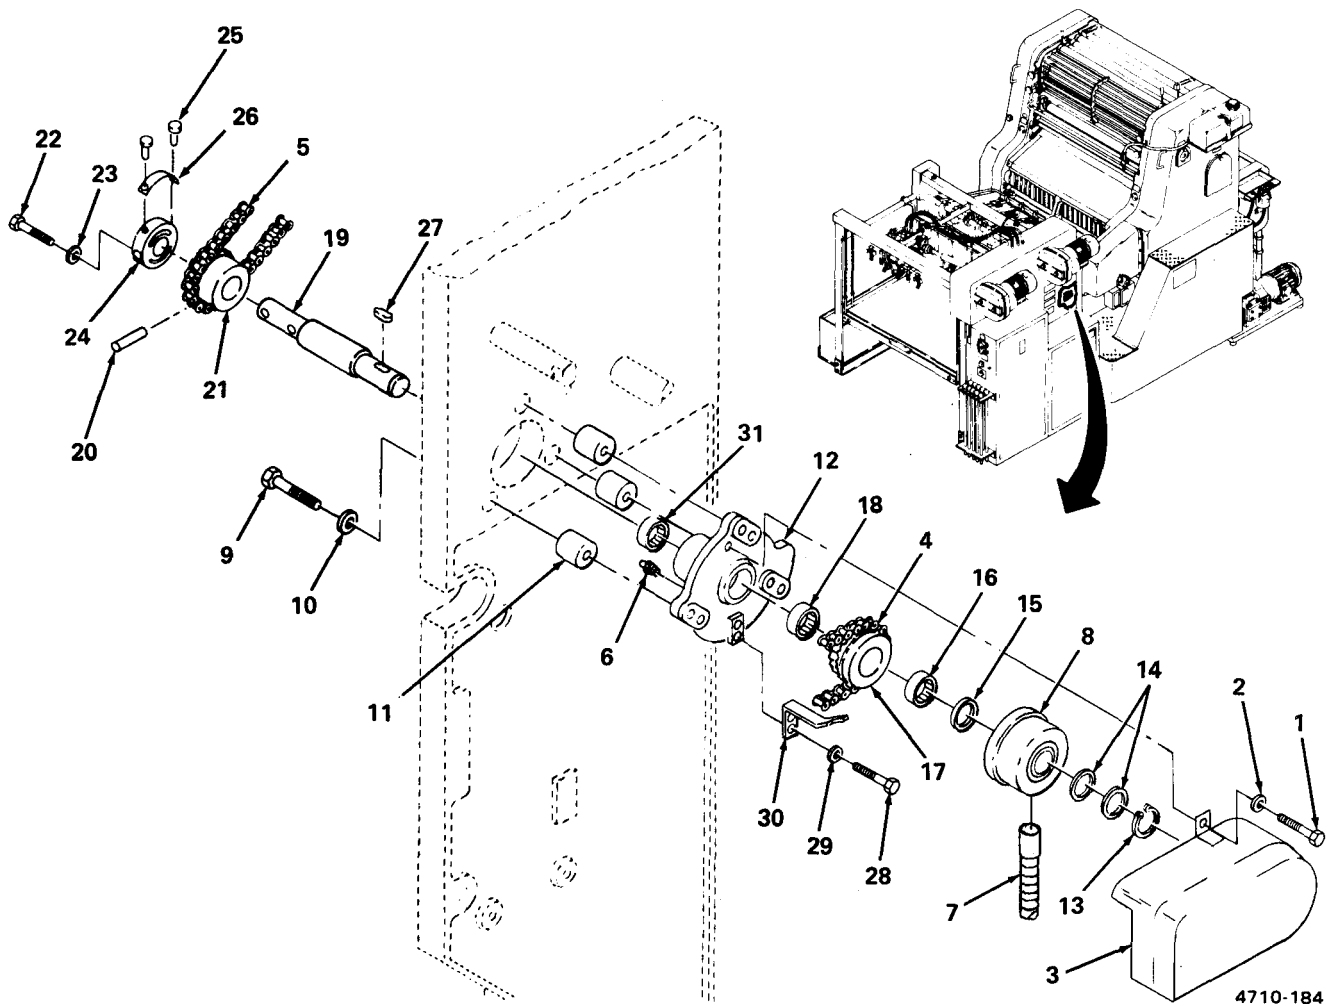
Magnetic Clutch Assembly Disassembly.
